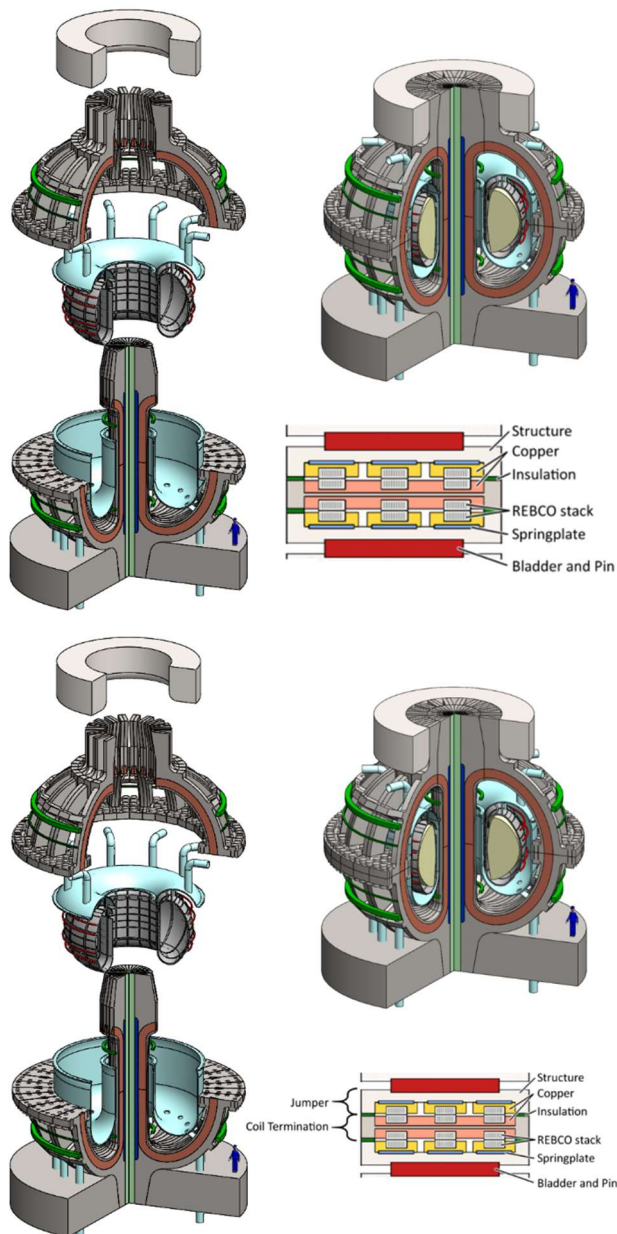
Illustration of the ARC coils. Left: reactor disassembled. Top right: reactor assembled. Bottom right: conceptual cross section of a joint. Images from [4], [7].
